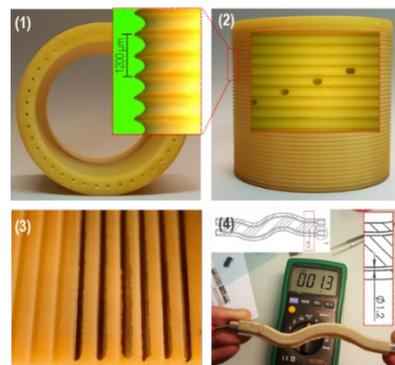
(1) & (2) 3D printed SRA prototype, (3) V-grooves plated ink layers, (4) channel test sample electrical resistance measurement.
